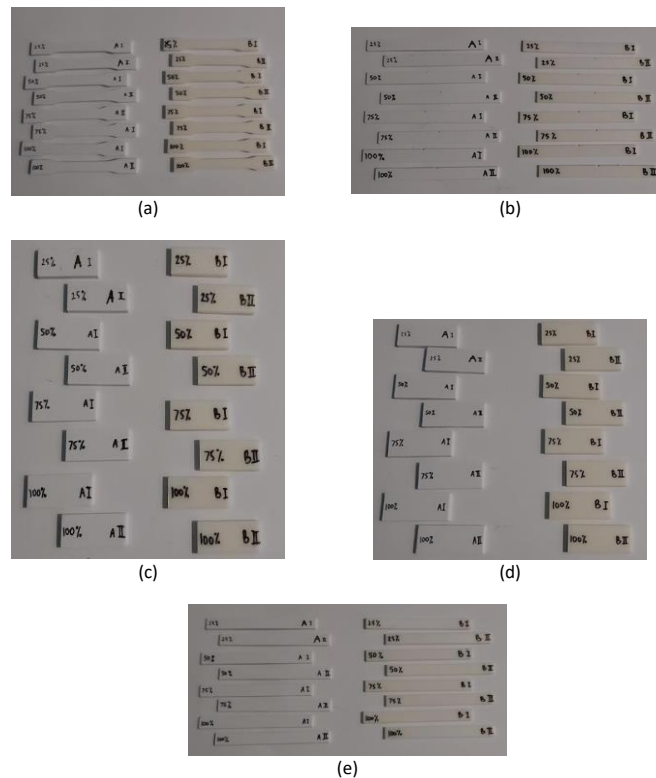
Material test specimens (a) tensile test specimen, (b) impact test specimen, (c) density test specimen, (d) hardness test specimen, and (e) bending test specimen
